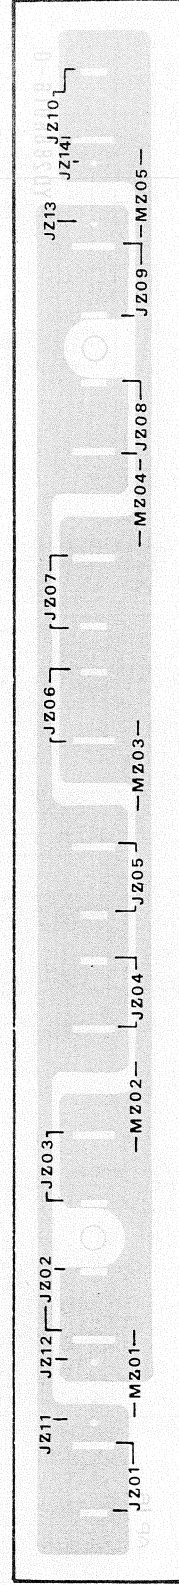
Dial Lamp Assembly (PZ01) Component Location
